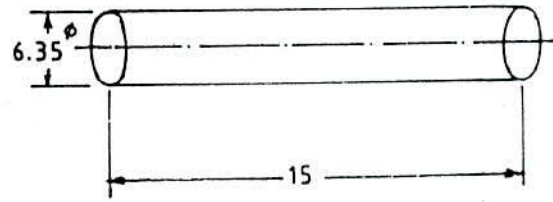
CROSS-SECTION OF THE TEST SECTION
